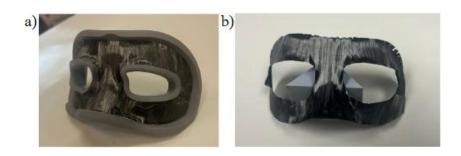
Face mask – version A (TR300 resin):(a) Component inside the mold, (b) Component after demolding.
